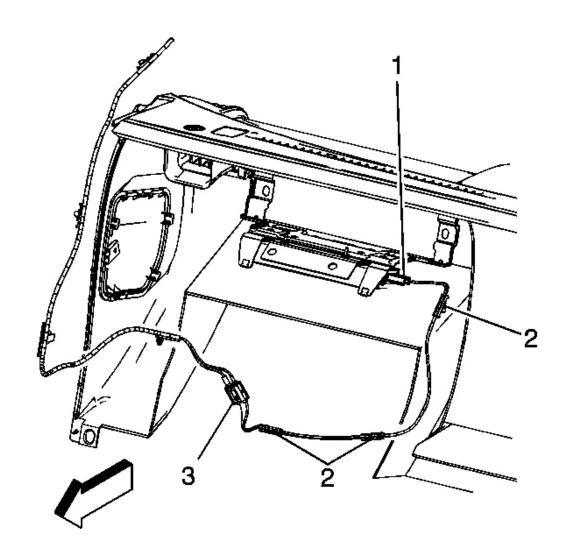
View Of Coax Cable & Components Courtesy of GENERAL MOTORS CORP.
